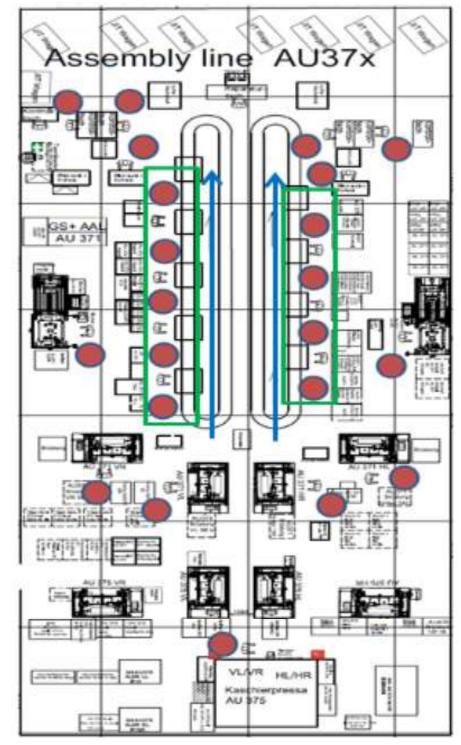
Assembly - models 371 and 375 - third step: (Internal documentation of SMP Slovakia)
